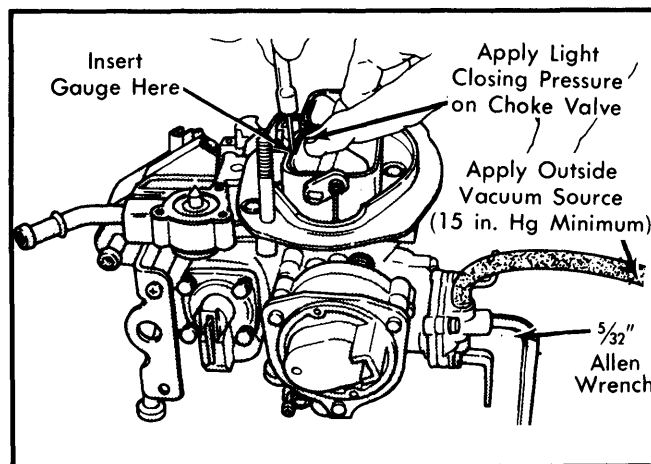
Adjusting Choke Vacuum Kick (Ford Motor Co. Models)
